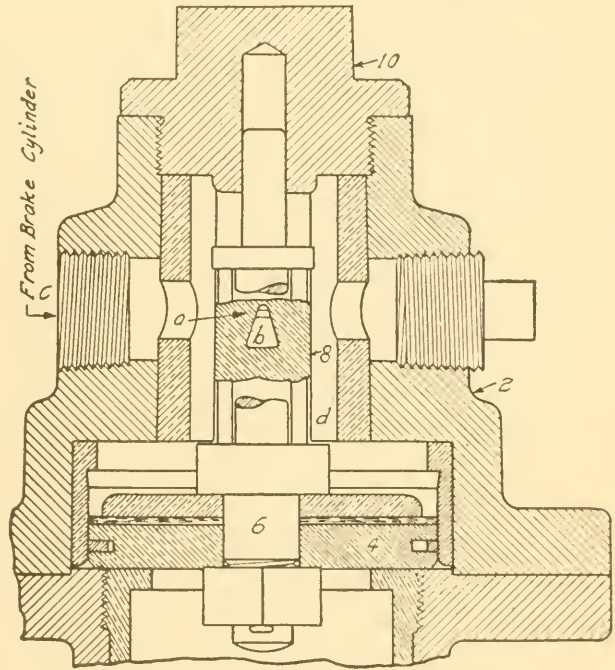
Position of Ports, Emergency Stop for Westinghouse High-Speed Reducing Valve
